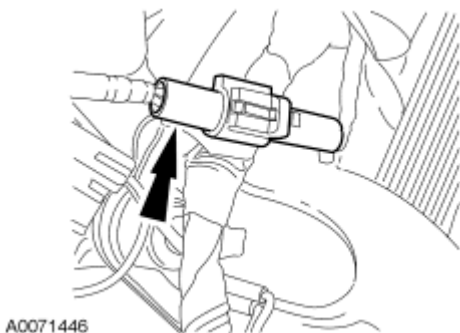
Cylinder Head Temperature (CHT) Sensor Electrical Connector
